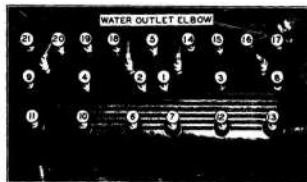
When installing the cylinder heads, tighten the nuts in the order shown above.
